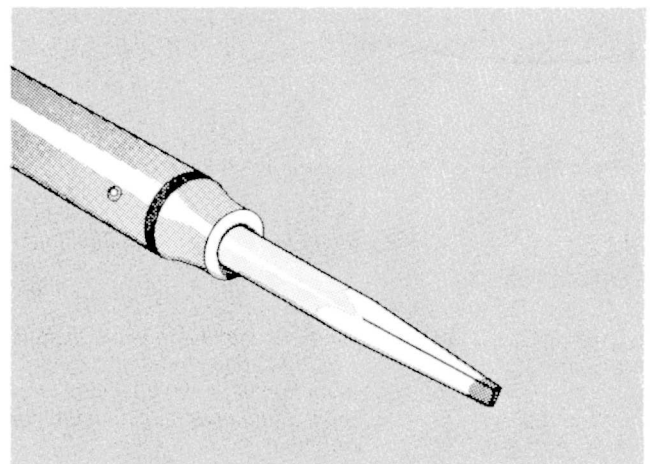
Soldering iron tip properly shaped and tinned.
